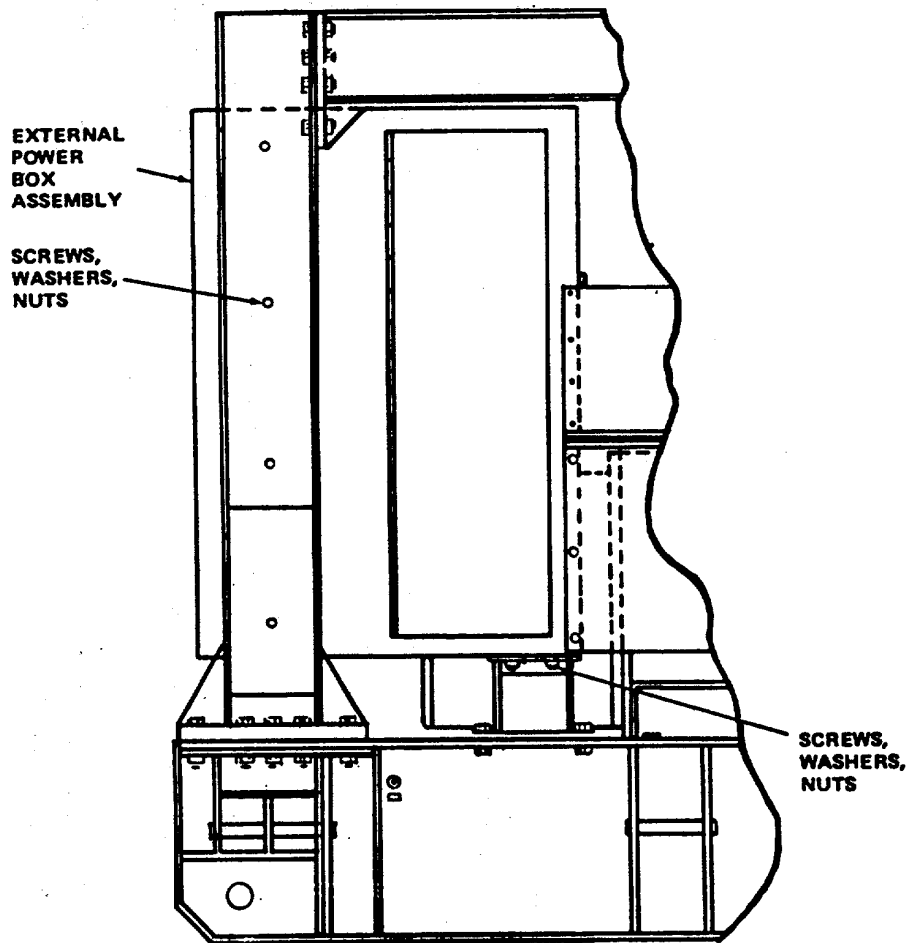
External Power Box Assembly, Removal and Installation (Sheet 1 of 2)
